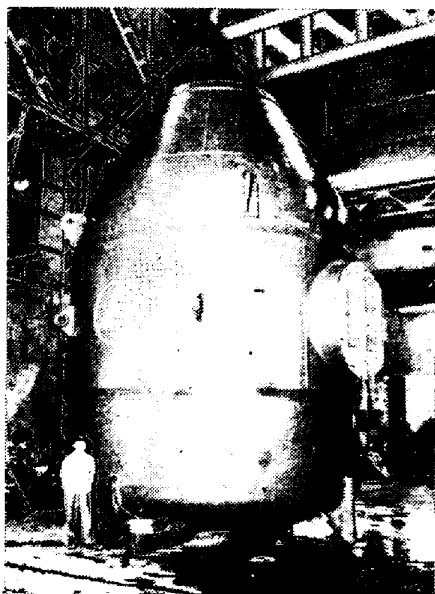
All-welded converter body without supporting frames (4,800 mm ϕ \times 7,500 mm high)
